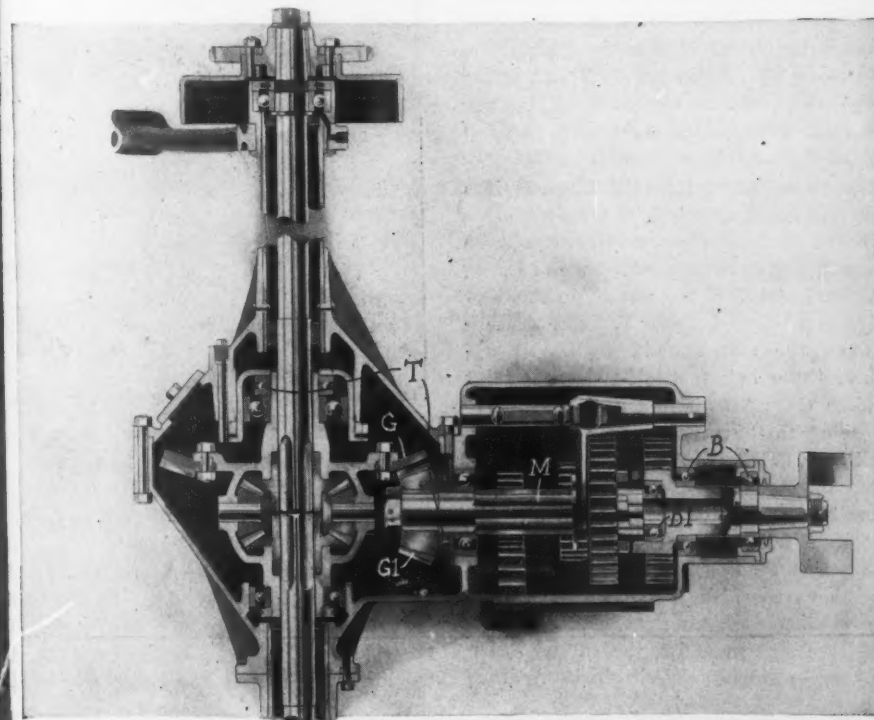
SHOWING GEARSET AND JACKSHAFT CONSTRUCTION
